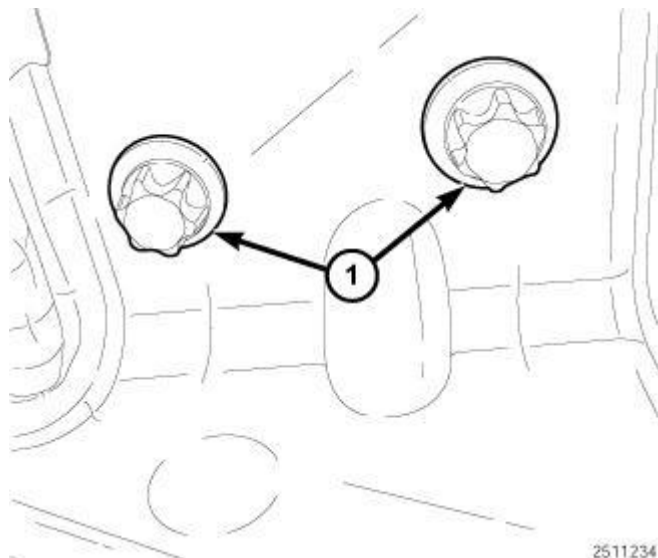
Charge Air Cooler CAC Tube Bolt
